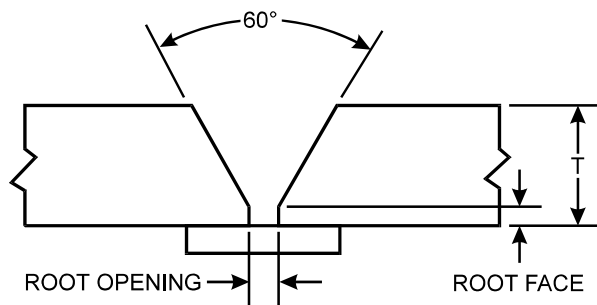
Tubular Groove Weld — Performance Qualification With Backing (see 5.21.3)
